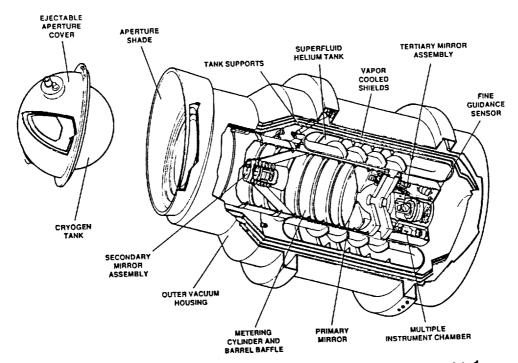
(a). Cut-away view of SIRTF telescope assembly<sup>1</sup>.
